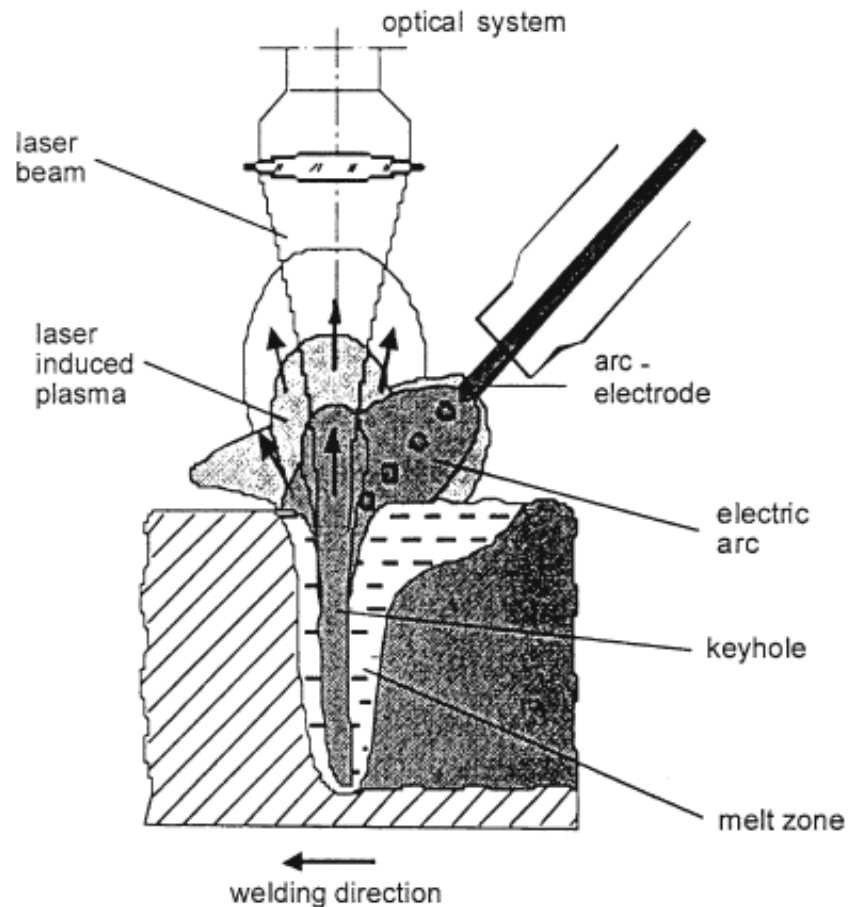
Laser-MIG/MAG welding process
